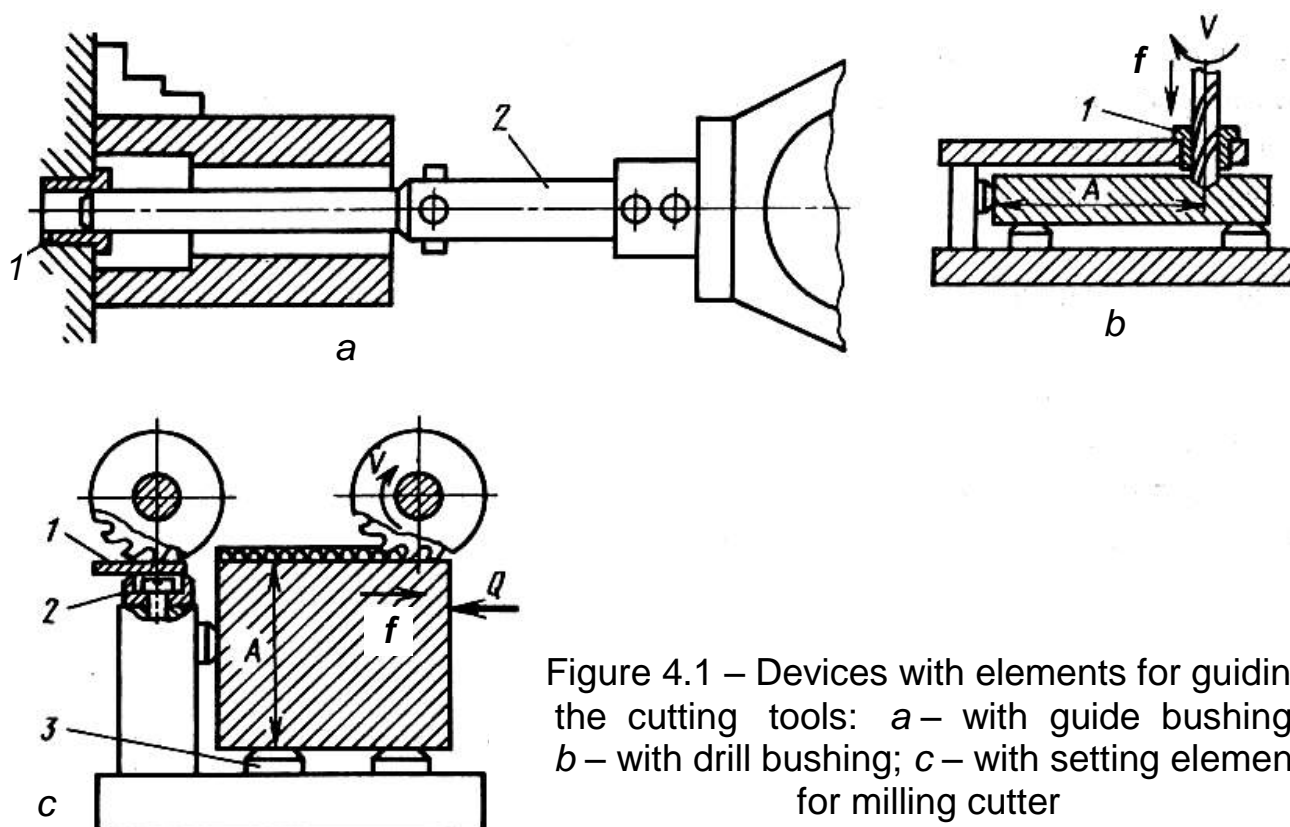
Devices with elements for guiding the cutting tools: a – with guide bushing; b – with drill bushing; c – with setting element for milling cutter
